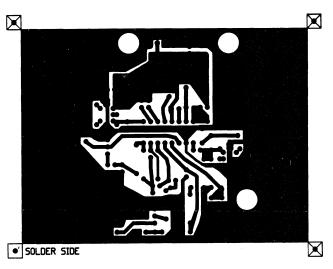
MC3371P PC BOARD CIRCUIT OR SOLDER SIDE AS VIEWED THRU COMPONENT SIDE
